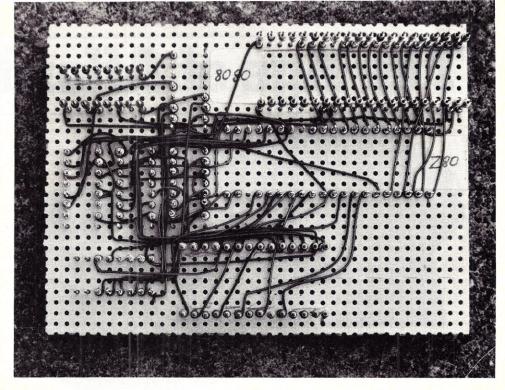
Bottom view of the adapter showing wire-wrap technique.
